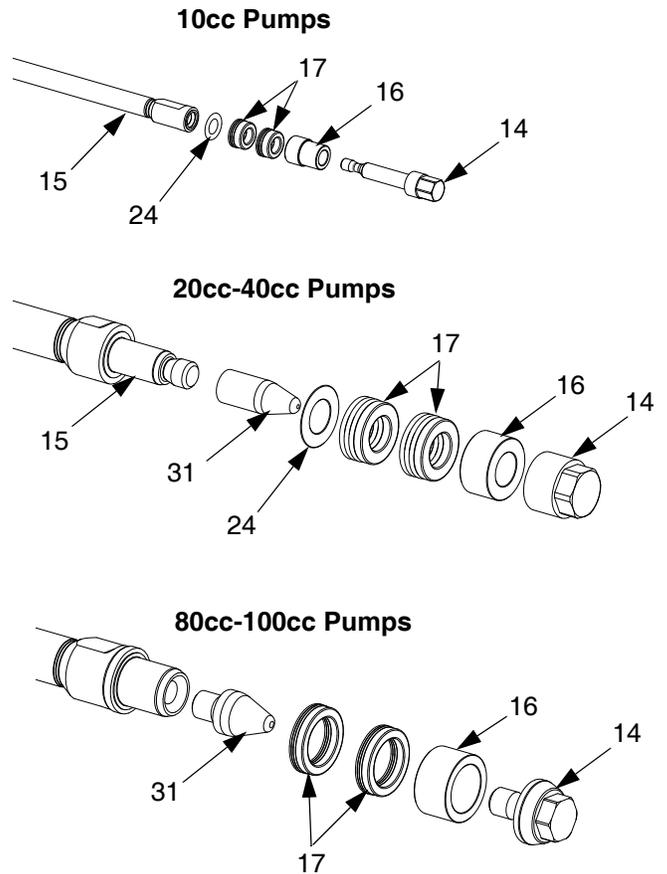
S5 Pumps Piston Assembly Tool (31)
